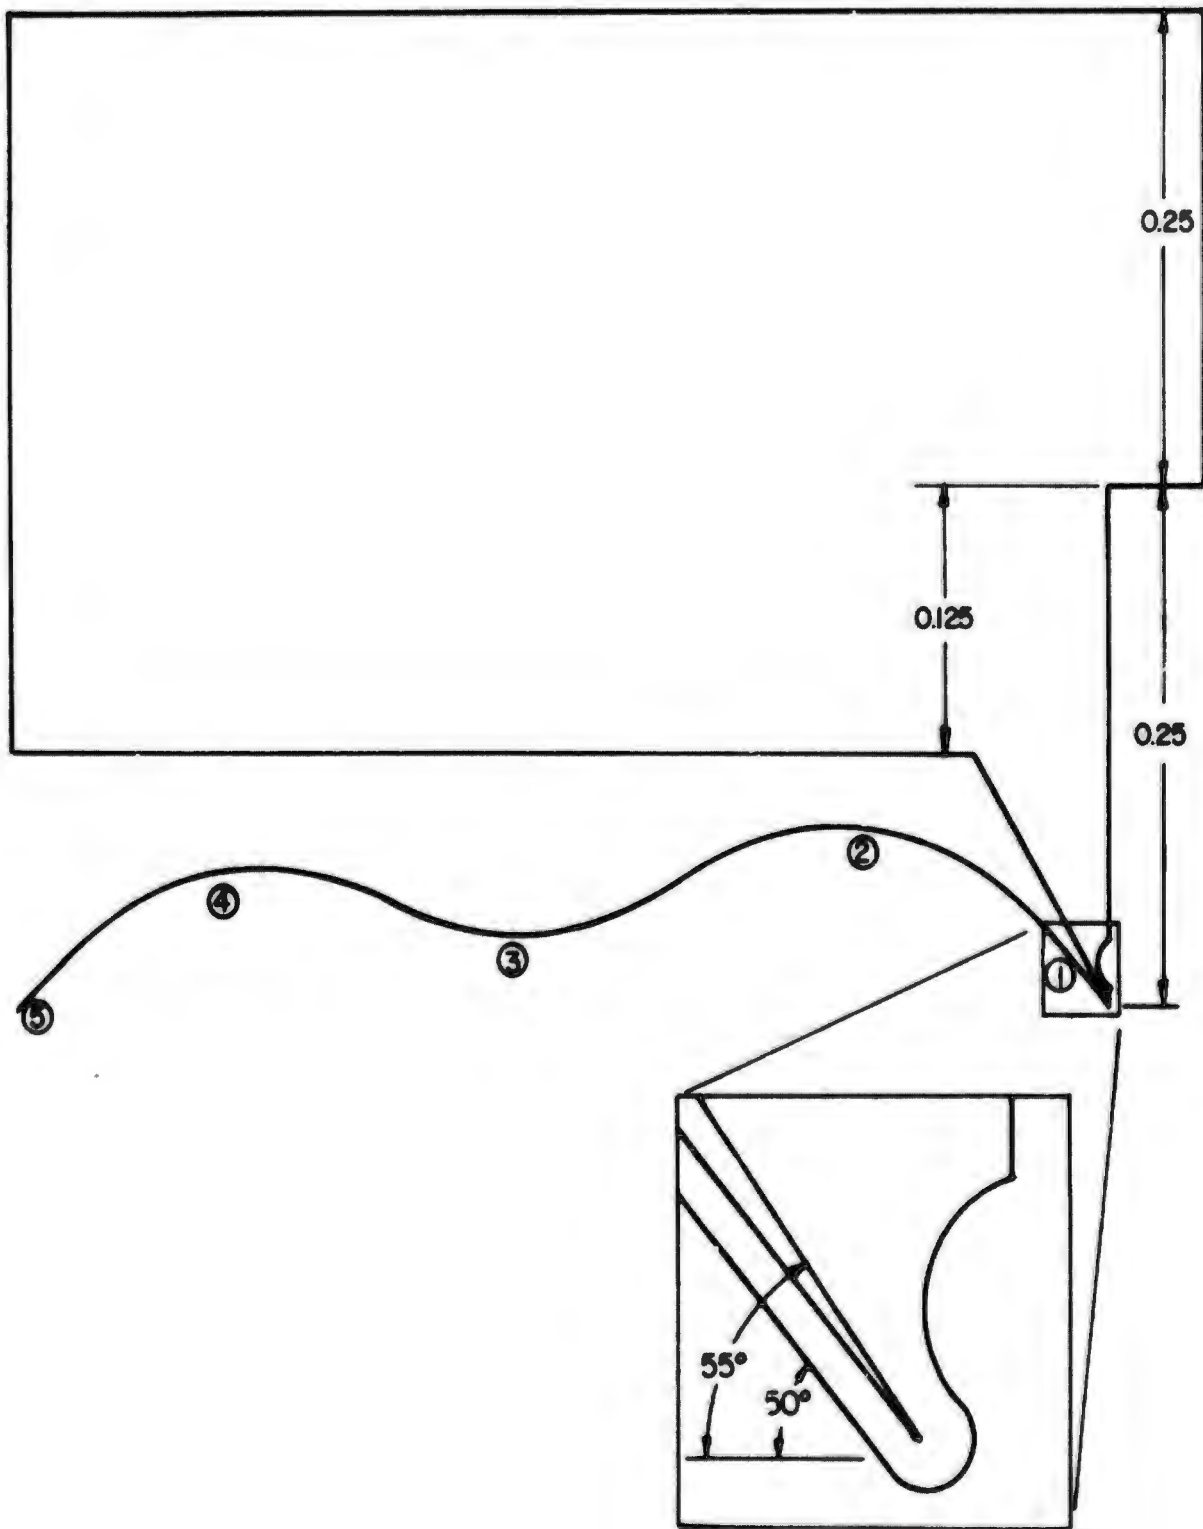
A TYPICAL UPPER END FITTING FOR A 3.5-INCH TILT-EDGE WELDED BELLOWS
